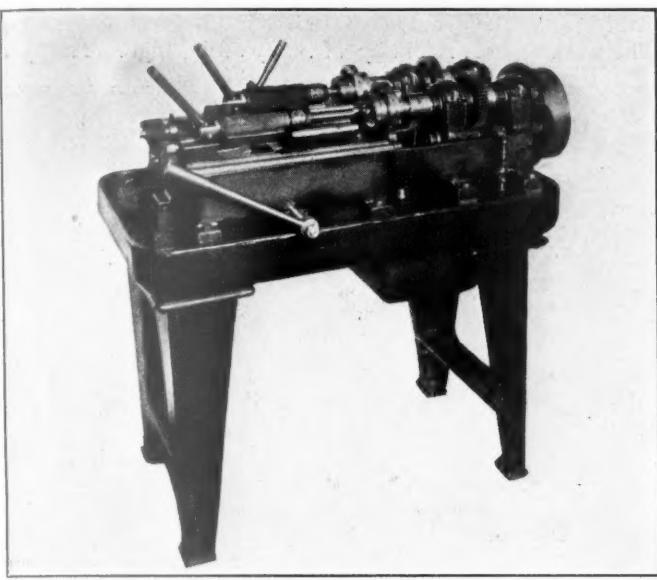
H. & G. Double Spindle Threading Machine, Model DS
